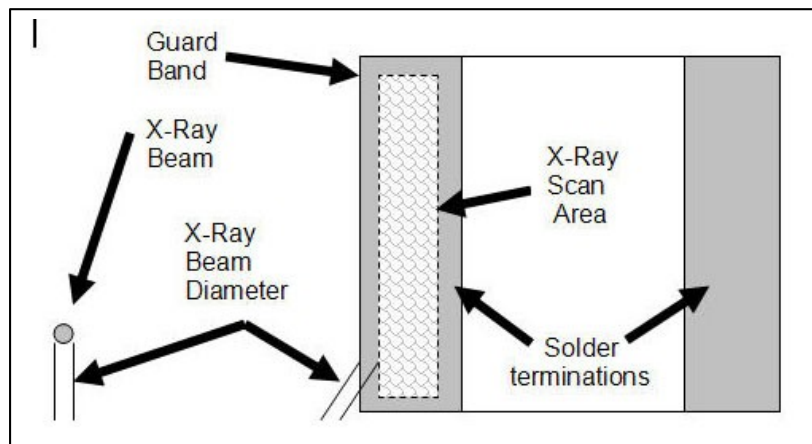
Example Measurement Zone on Surface Mounted Devices
